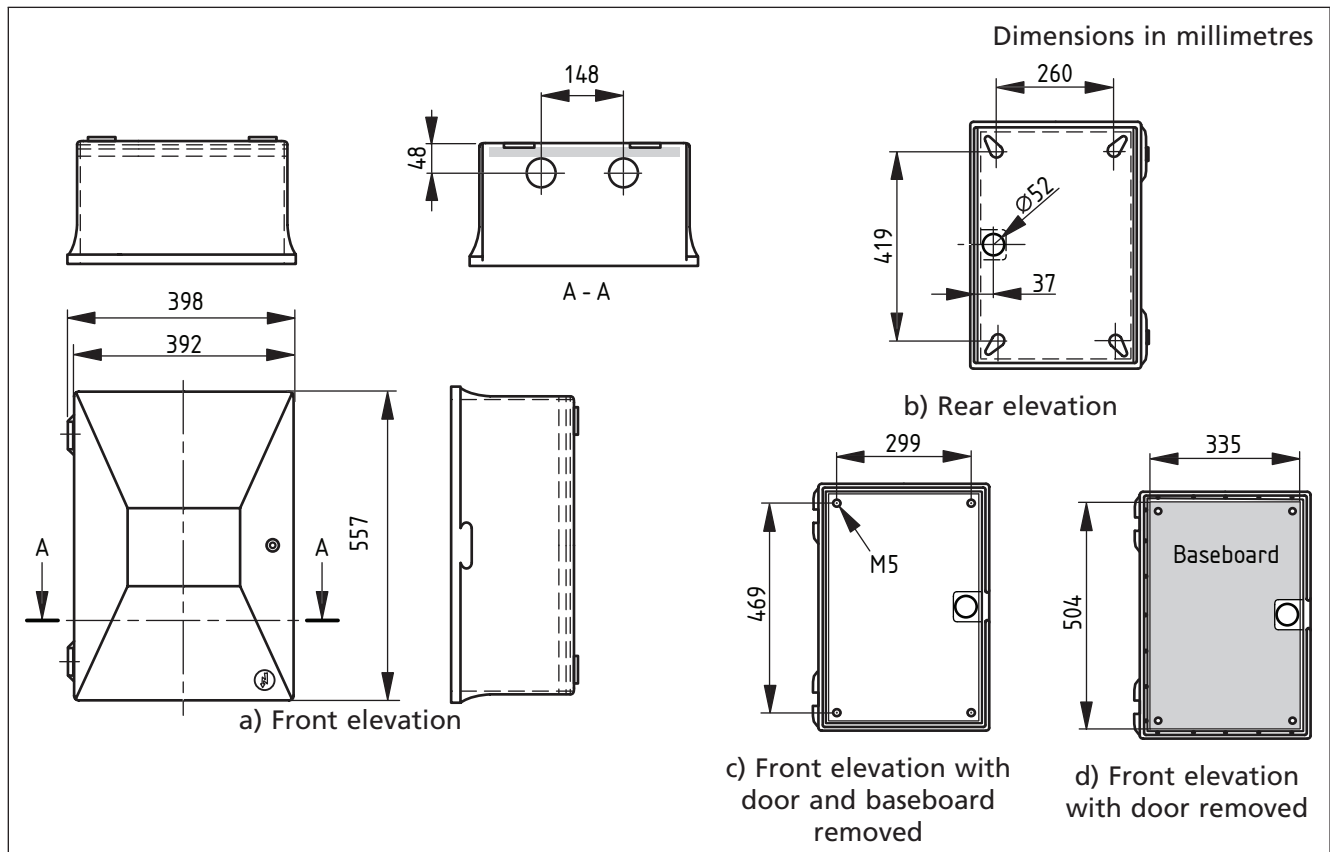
Large surface-mounted electric meter cupboard (minimum dimensions)
